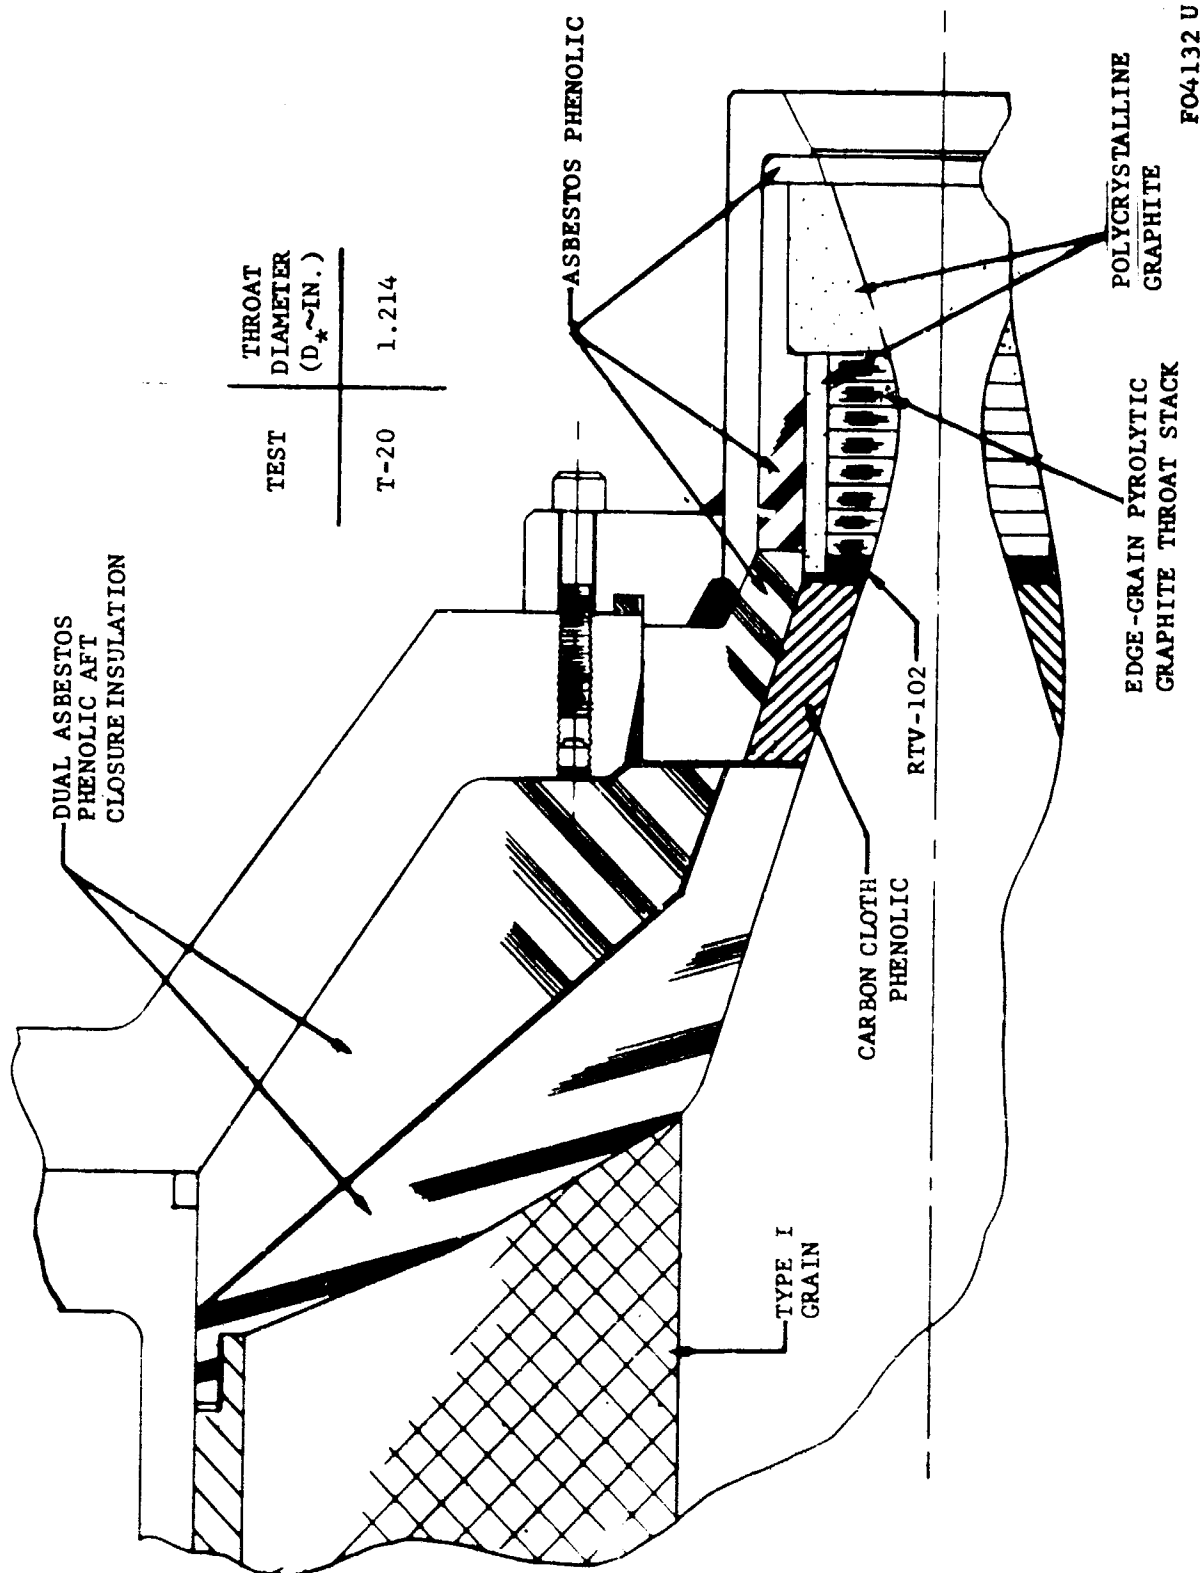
NOZZLE DESIGN FOR TEST T-20
